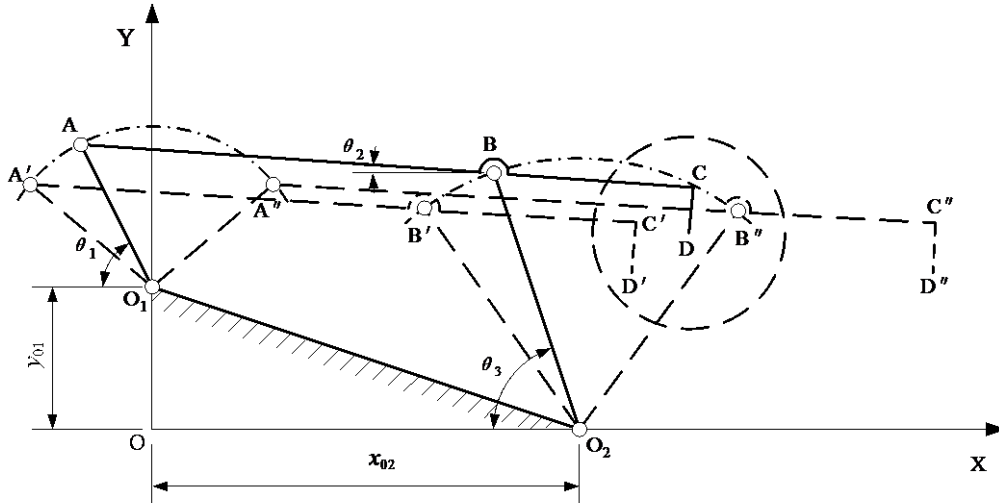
Sketch map of the conveying mechanism of hot sawing machine
